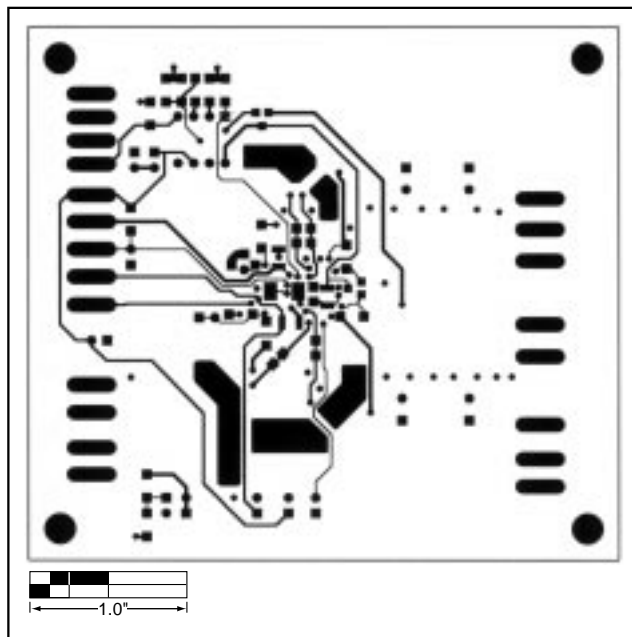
MAX1630/MAX1631/MAX1632 EV Kit PC Board Layout—Solder Side
